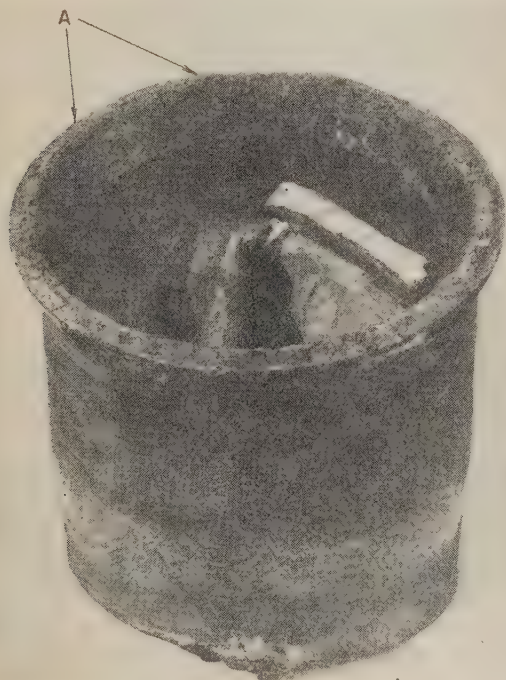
CORROSION RESULTING FROM ACID ATTACK ON STRESSED METAL AT FLARED END OF COLD-ROLLED TUBE
